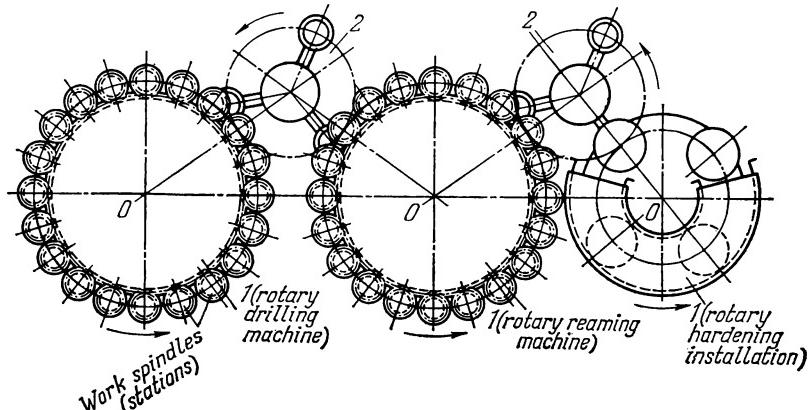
Combining drilling, reaming and hardening in a single rotary machine transfer line
